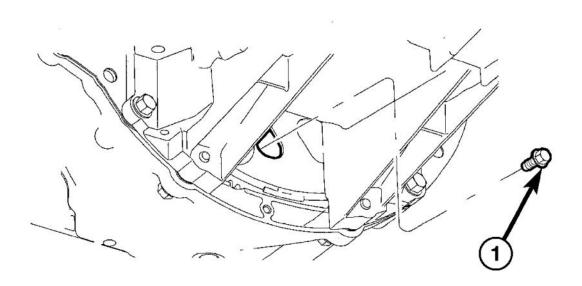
Engine Mount Bolt Courtesy of CHRYSLER LLC
